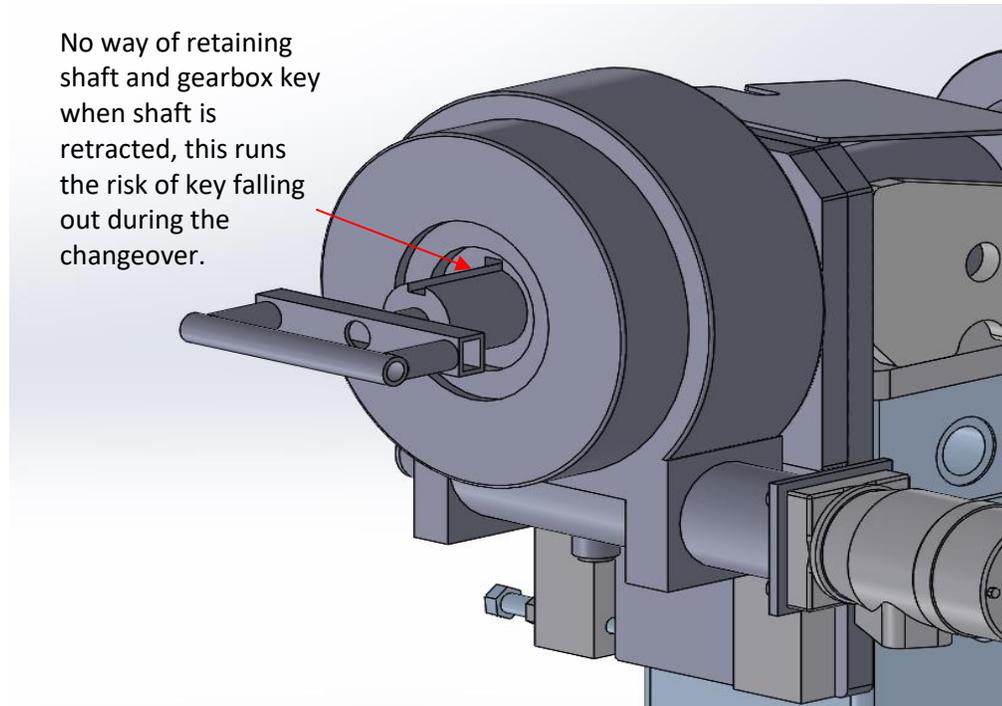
Drive End Iteration #1, Gearbox and Retractable Shaft
